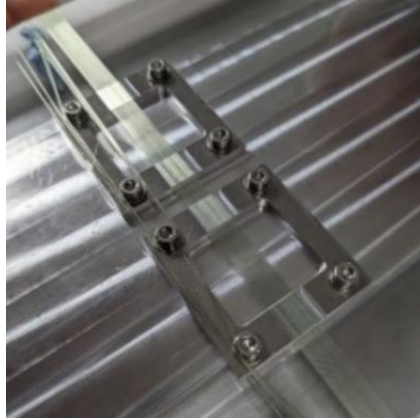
Image of the mark II prototype under construction where the scintillating fibres are being aligned using the winding jig.
